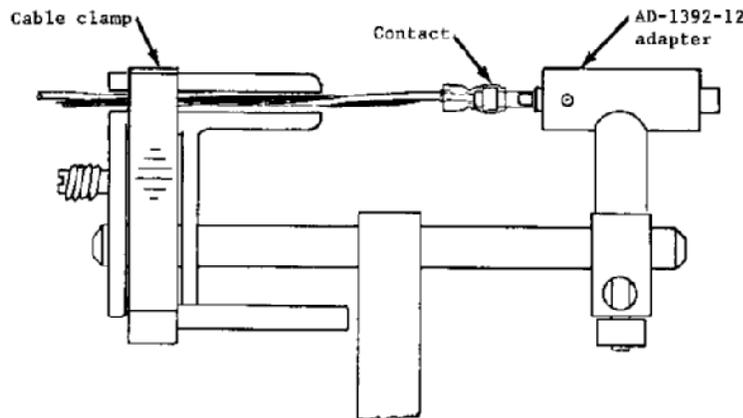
Contact Inserted into AD-1392-12 Adapter
